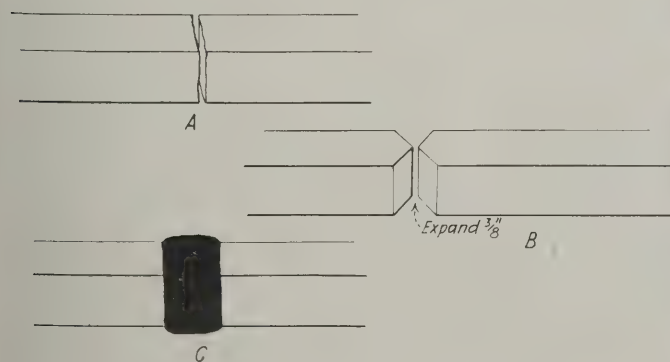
Stages in Frame Welding by Gas Torch
